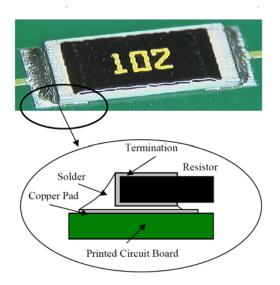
A photo and diagram of a typical surface-mounted resistor soldered to a PCB.
